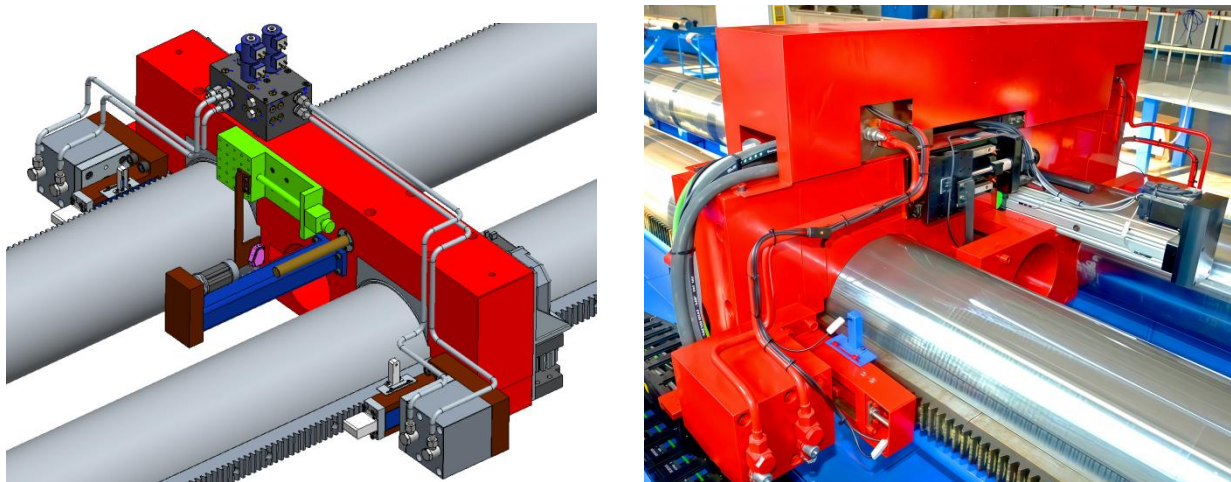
3D Drawing & Physical Photo of Jacking Trolley
